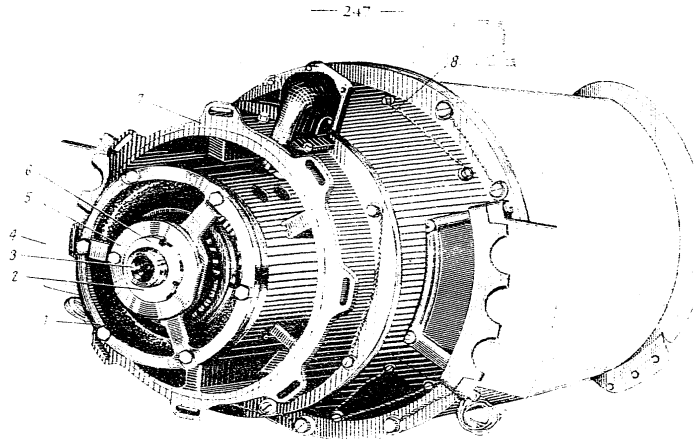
GENERATOR WITH AIR CRANK REMOVED
